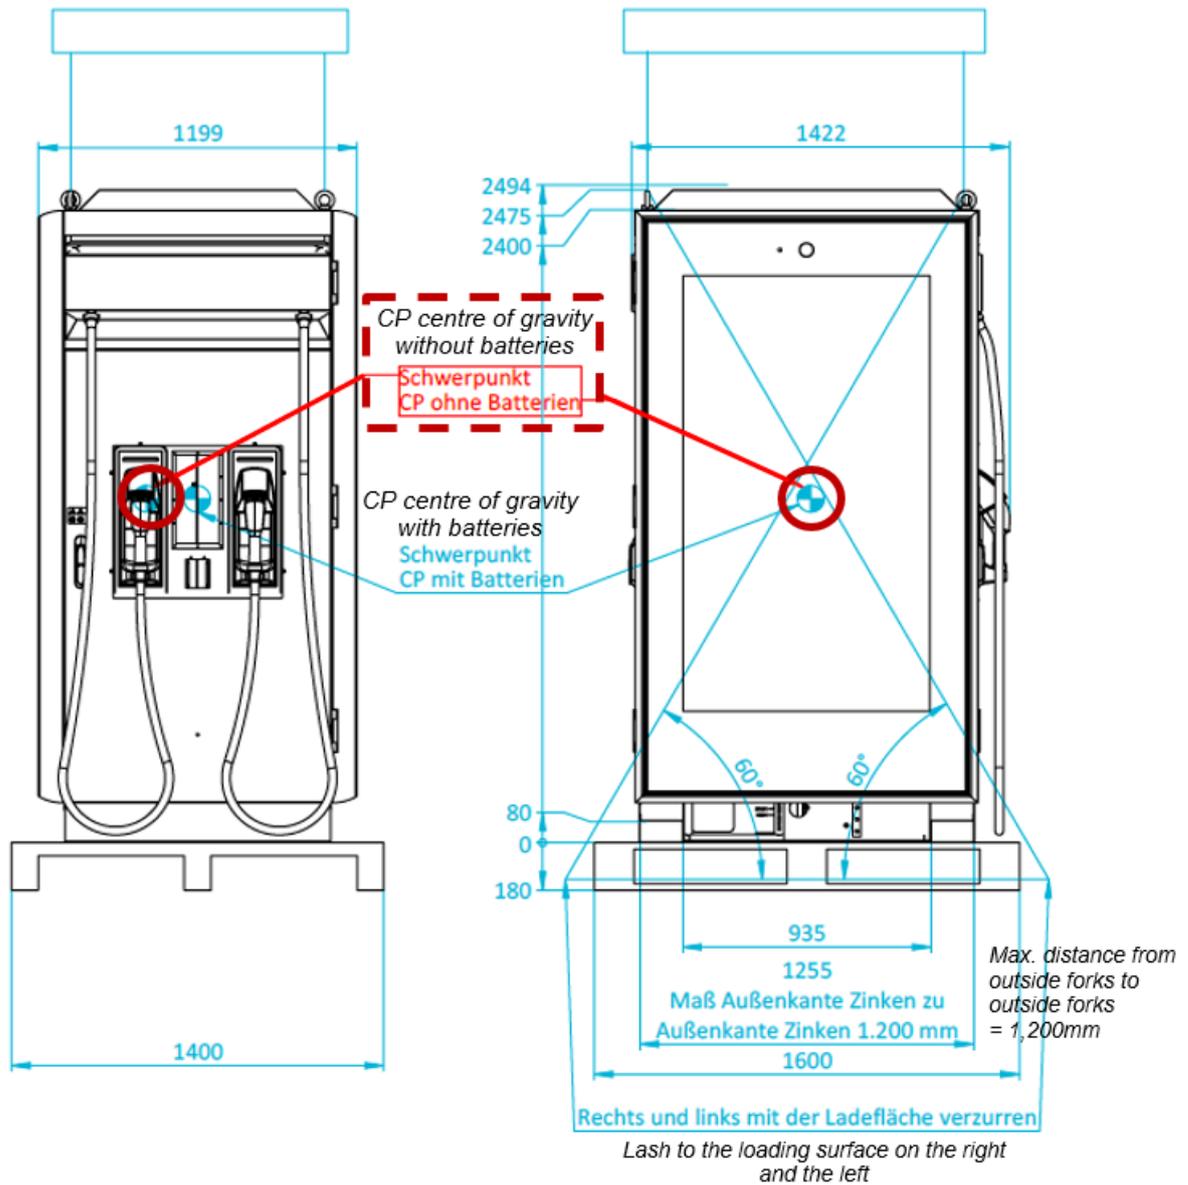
CENTRE OF GRAVITY AND DIMENSIONS (DETAIL FROM CONSTRUCTION DRAWING)
